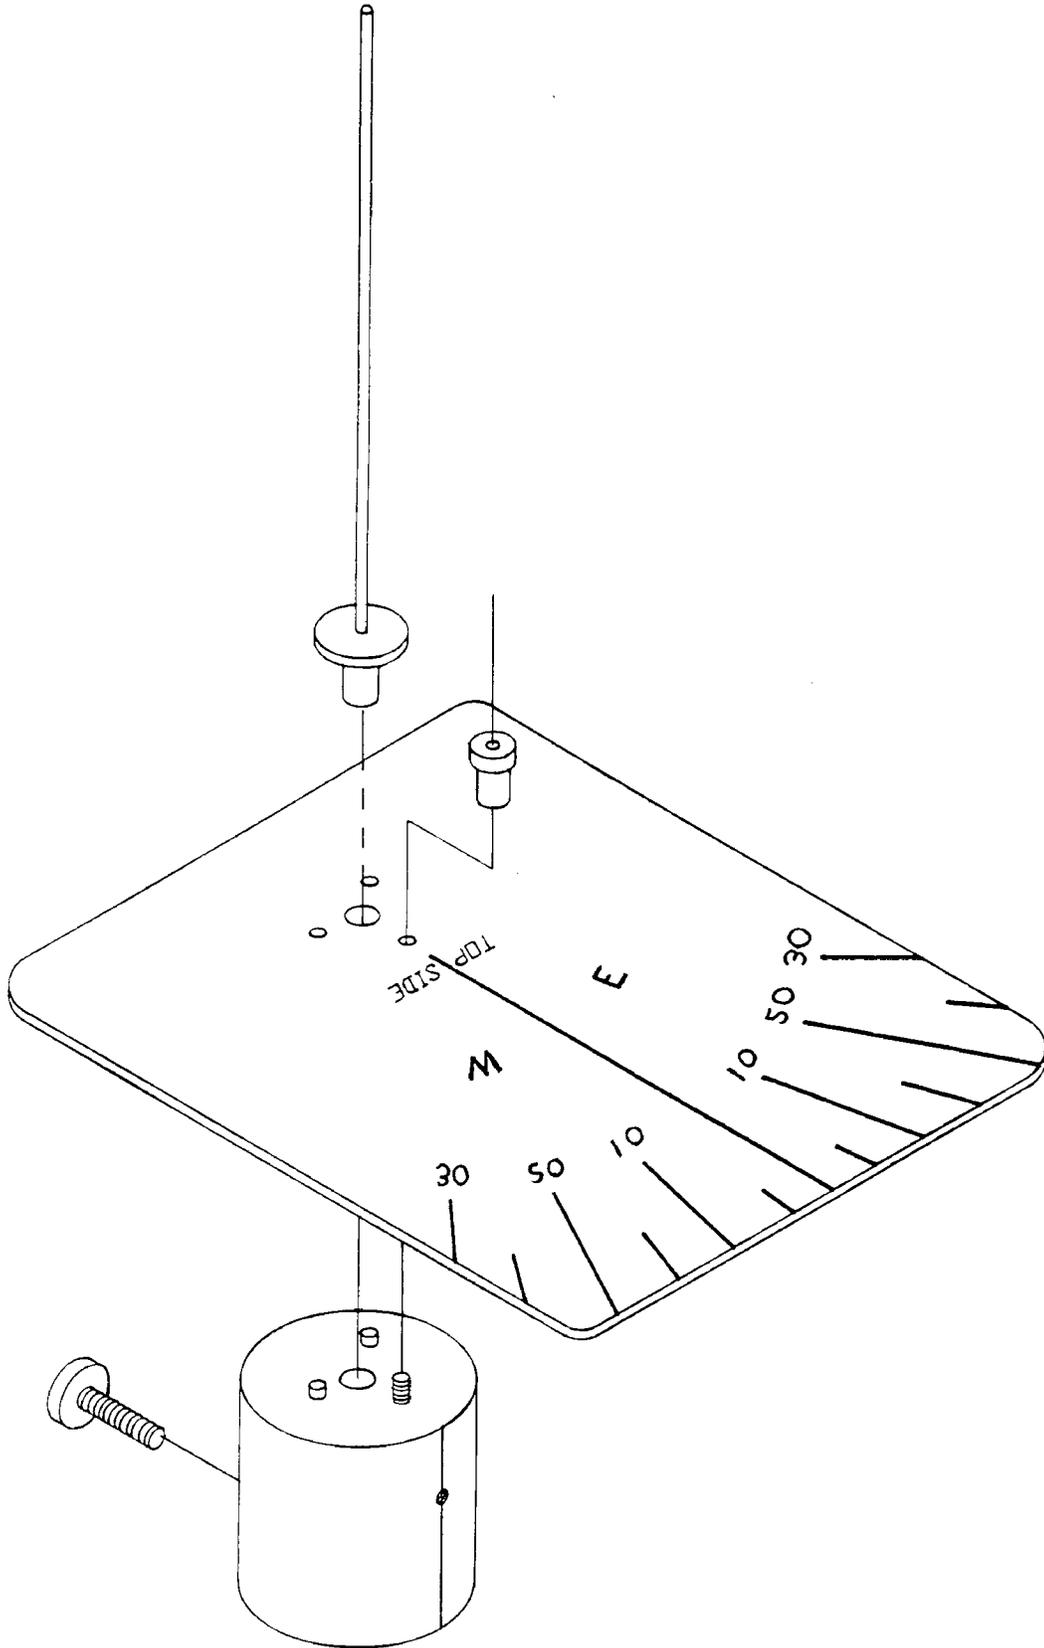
Wind Direction Sensor Alignment Tool
